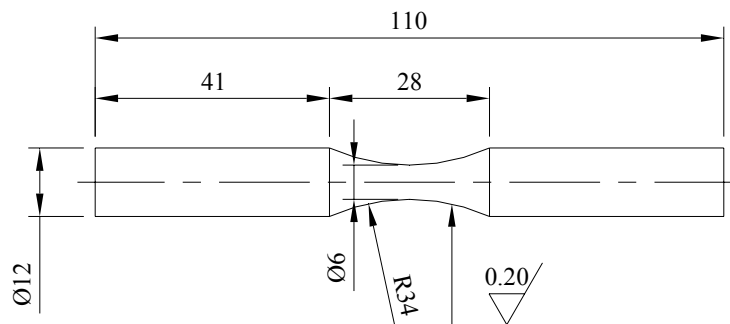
Dimensions of the specimens used in the fatigue tests [3.21].
